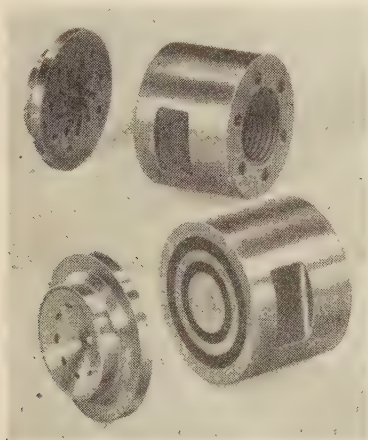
BABCOCK & WILCOX STEAM MECHANICAL ATOMIZING SPRAYER PLATE
